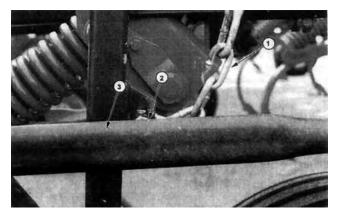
Restraint Chain Link Assembly: (1) Chain Link, (2) Lower Bolt and (3) Depth Link Adjustor Rod.
